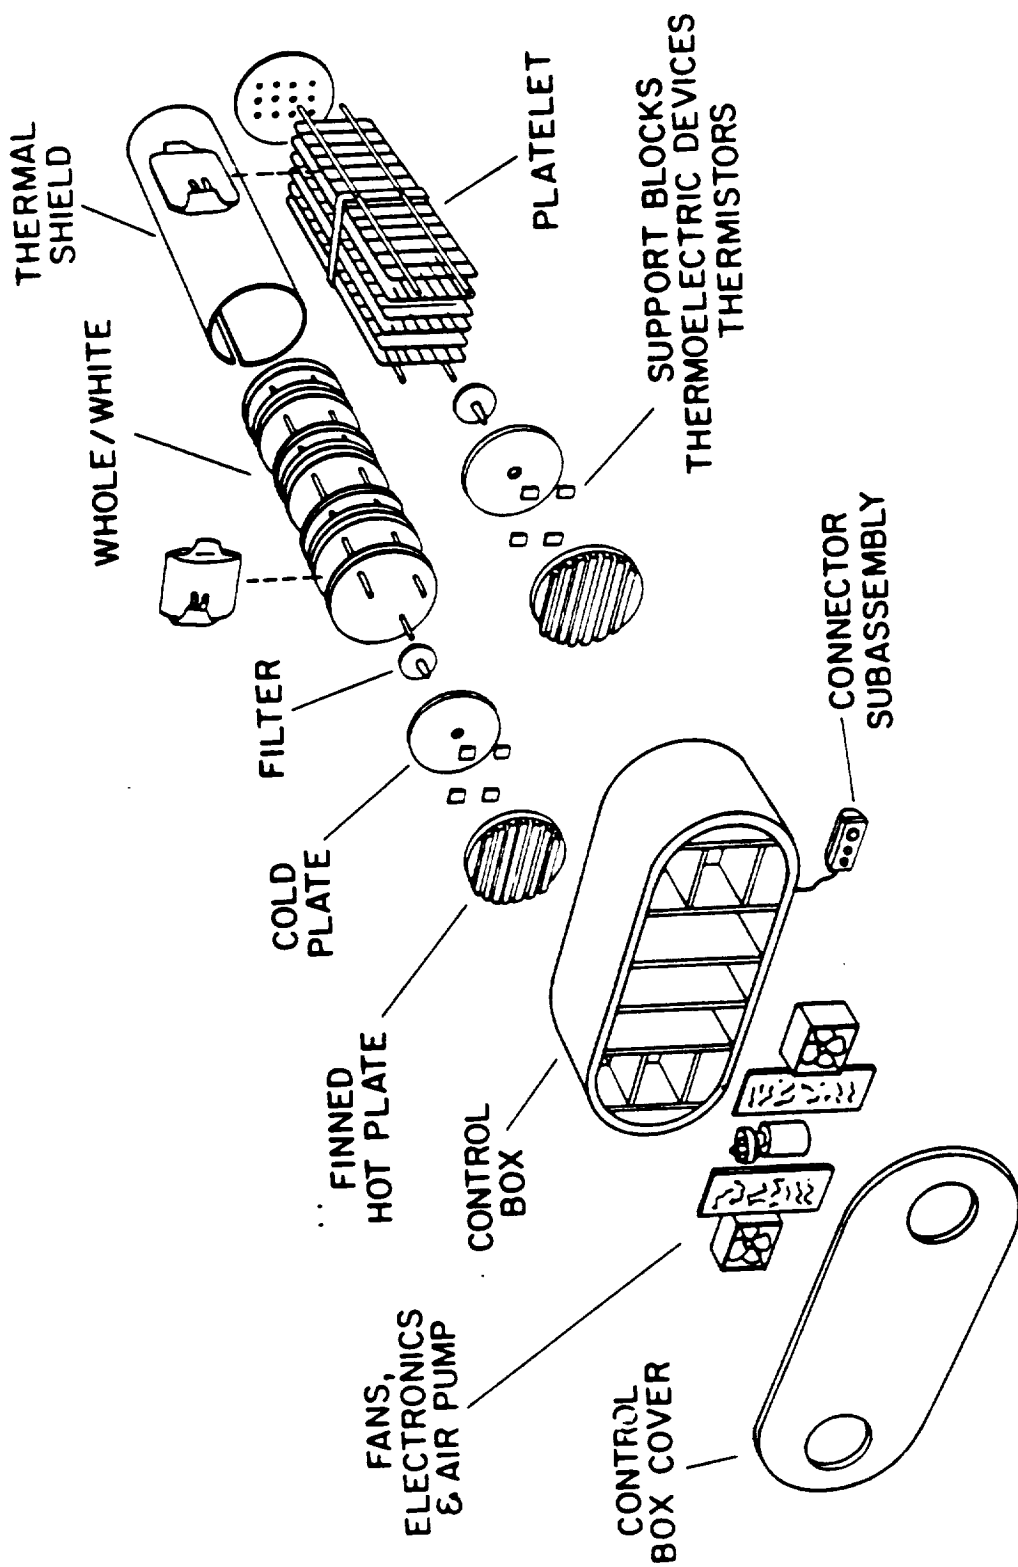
DETAILED EXPLODED VIEW OF THE COLD/WARM MODULE
